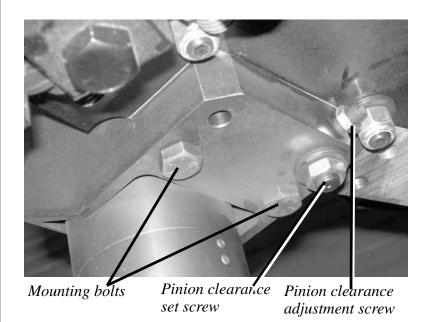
Two bolts fasten the air motor mount to the frame. To set the pinion clearance, loosen the set screw and turn the adjustment screw. Re-tighten the set screw.
